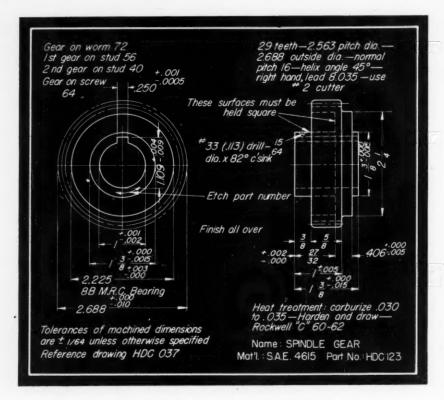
Above—Drawing of assembly used in unit HD-1A (see Fig. 2). Number of assembly is that of its major part, the spindle gear, preceded by the letter X
